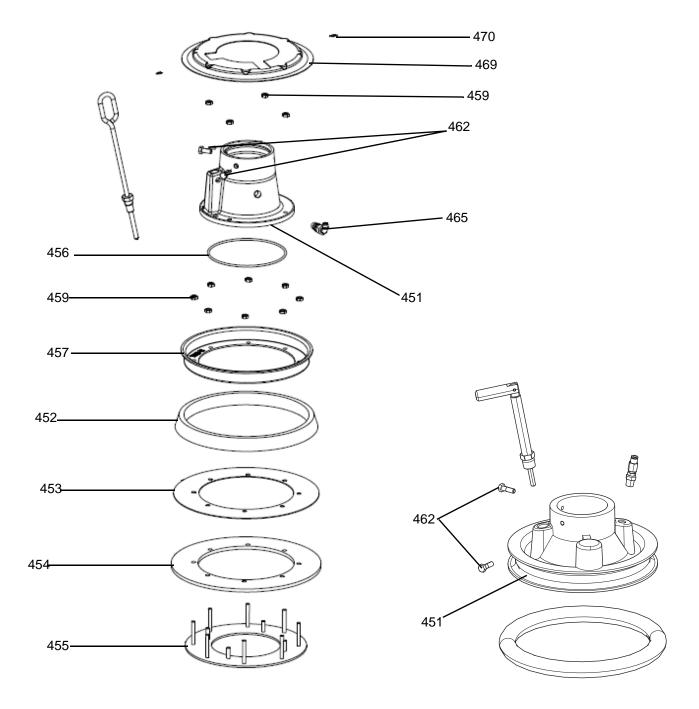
20 Liter (5 Gallon) Single Wiper Assemblies
